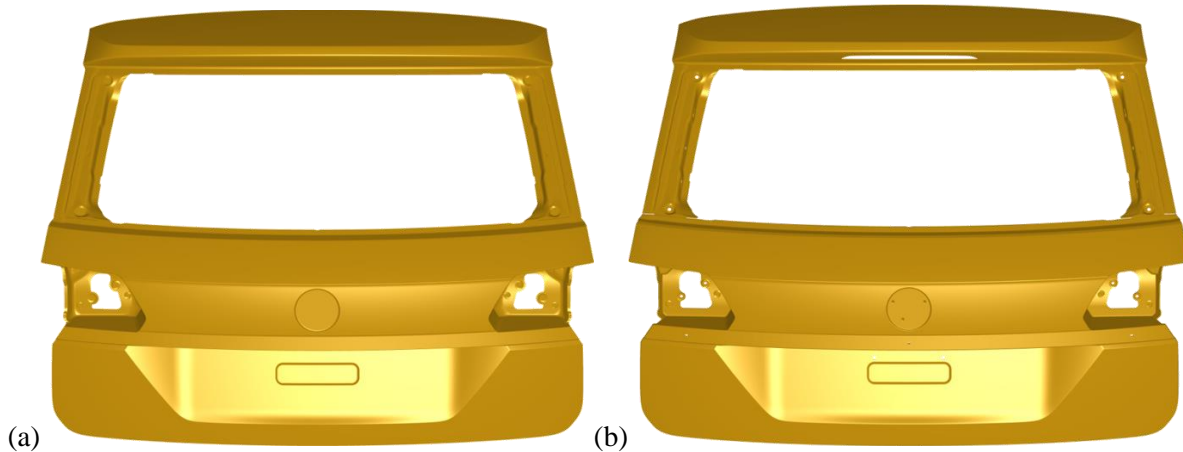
SMC outer panel from (a) Purdue design and (b) CSP final detailed design for tooling.
